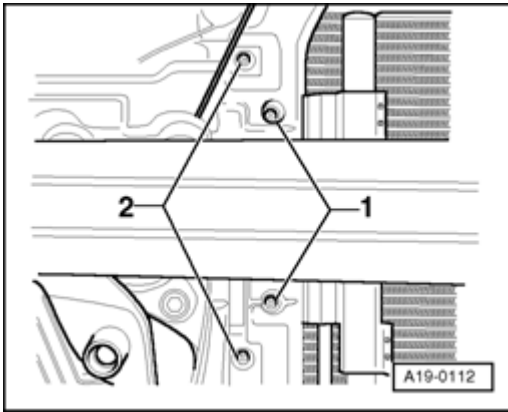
Removing Four Securing Bolts For Condenser & Radiator
